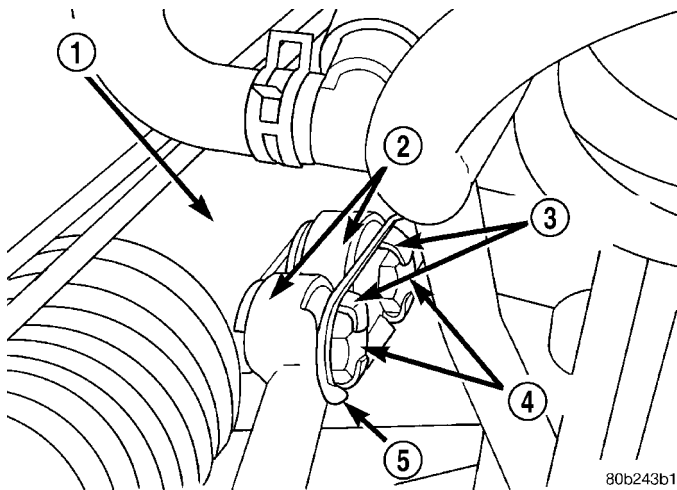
Tie Rod Attachment Bolt Retaining Tabs
